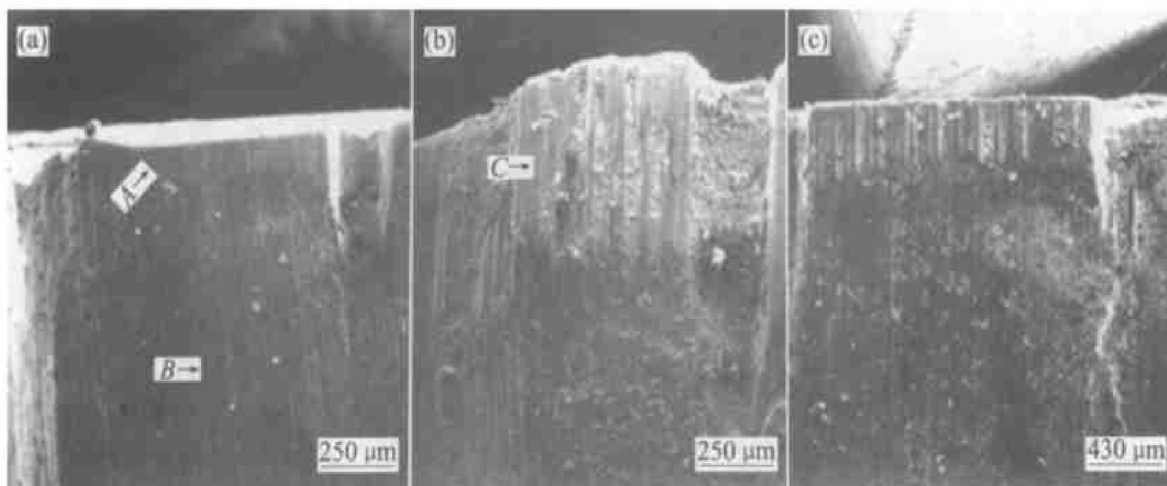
Macroscopic wear patterns in tool flank under different conditions
